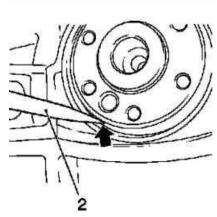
Places Hole: 1 - space for holes, 2 - the right tool
